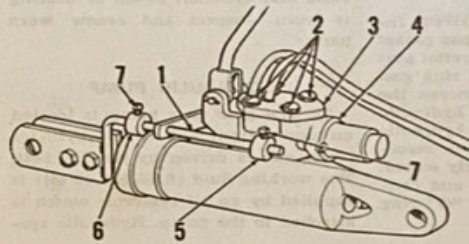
Pony hydraulic cylinder and control valve assembly.
